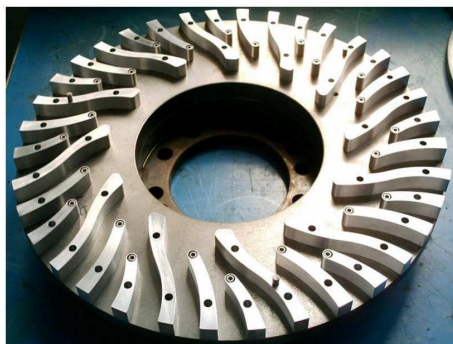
Experimental prototype of the *D32* brake disc design fully assembled.
